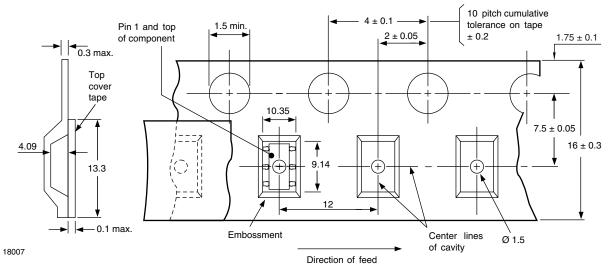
Tape and Reel Shipping Medium (1000 pieces on reel)
